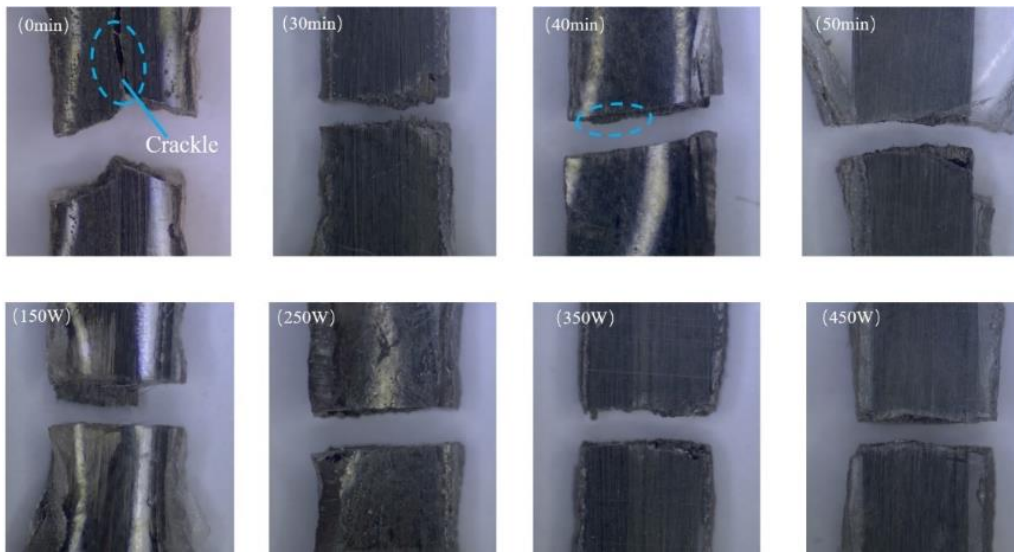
Optical morphology of tensile fracture damage of CFEP composites
